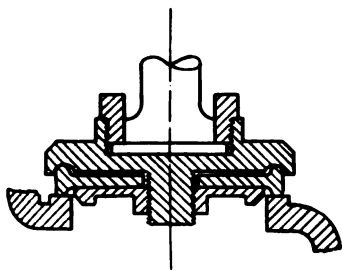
Enlarged Section Through Valve Disc and Seat for 2-inch Crane Globe Valves Tested. Dimensions Given in Table 2, Page 26.
